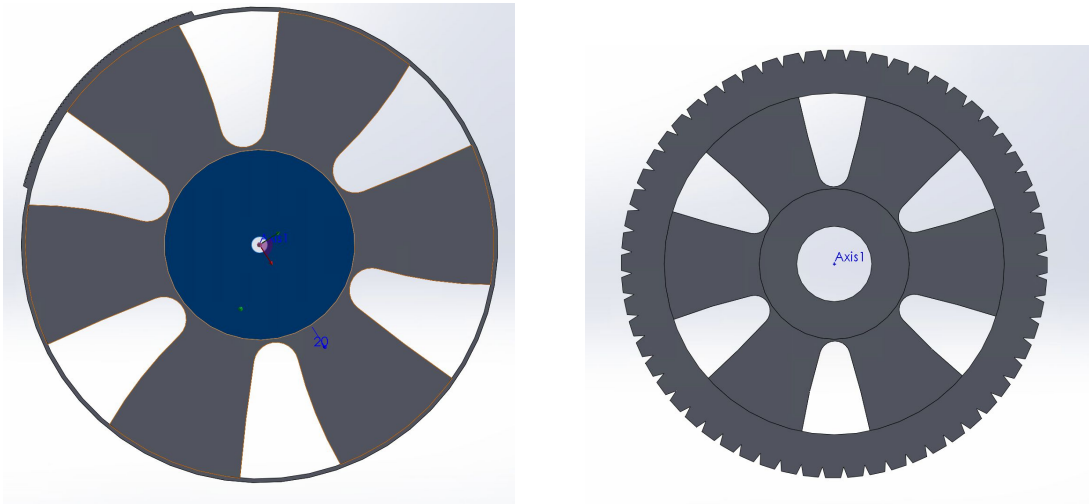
Lifter wheel and pinion Solidworks drawings
